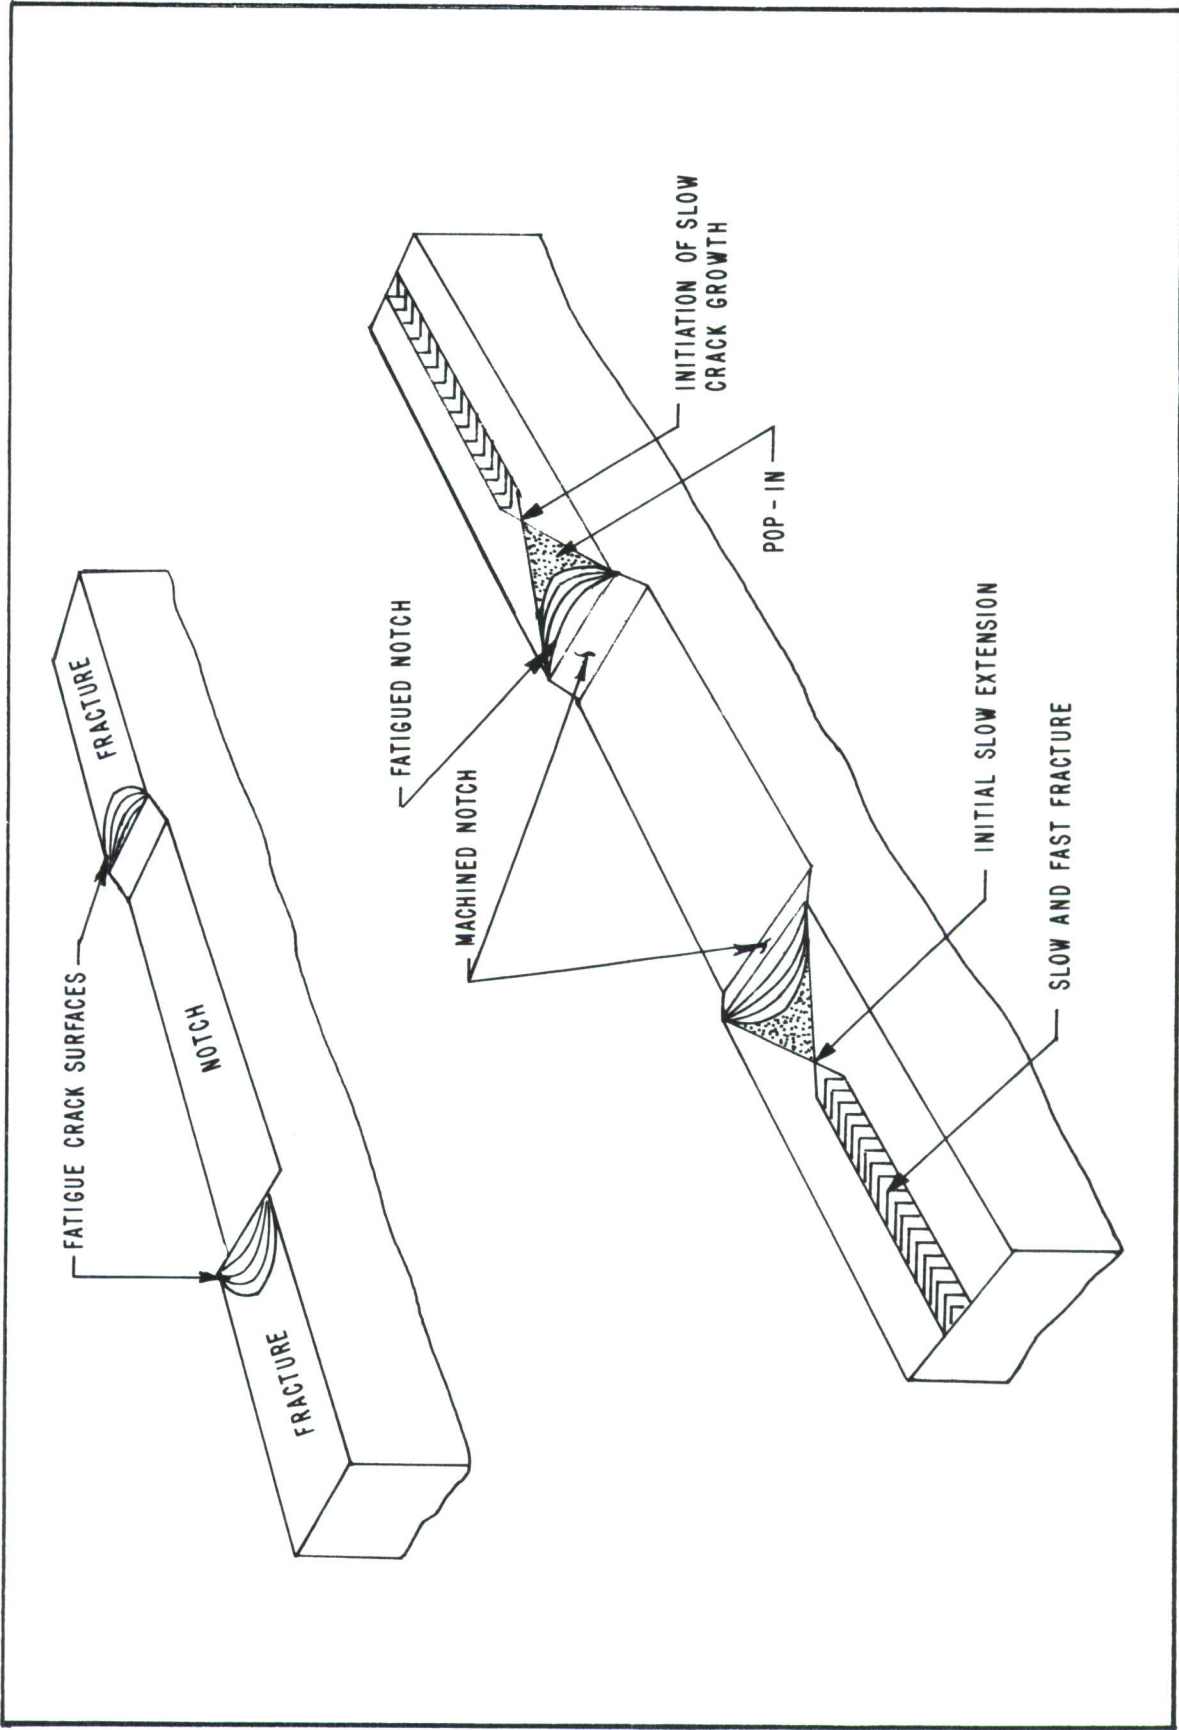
Fracture Surface of Fatigue Cracked Center-Notched Tensile Specimen.
